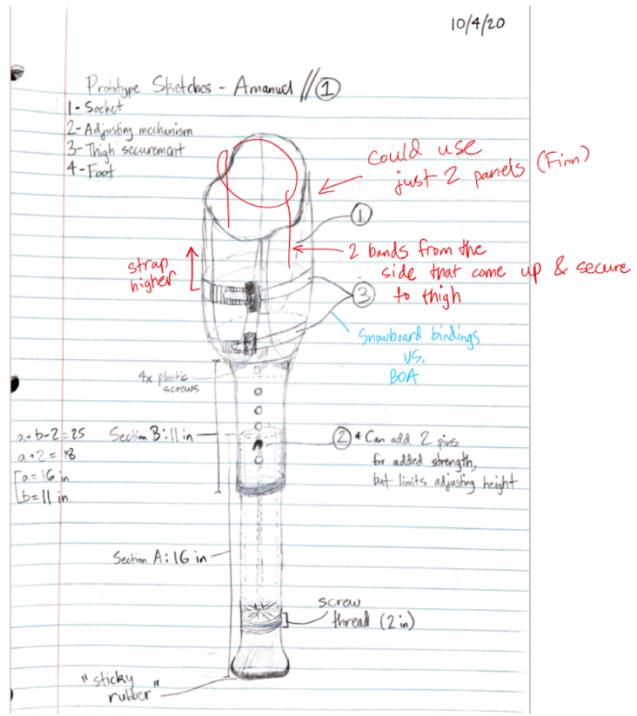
[D]: Telescope/ Concentric Piping Collapsibility
